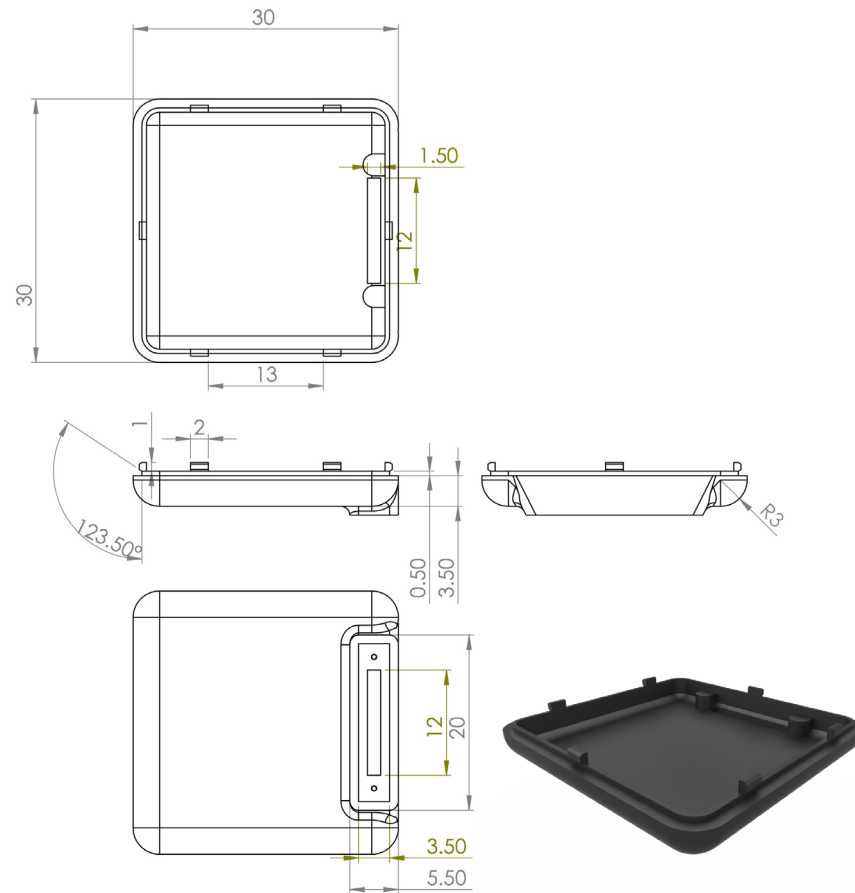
Figure showing the engineering drawing of the bottom piece. All measurements are in mm.
